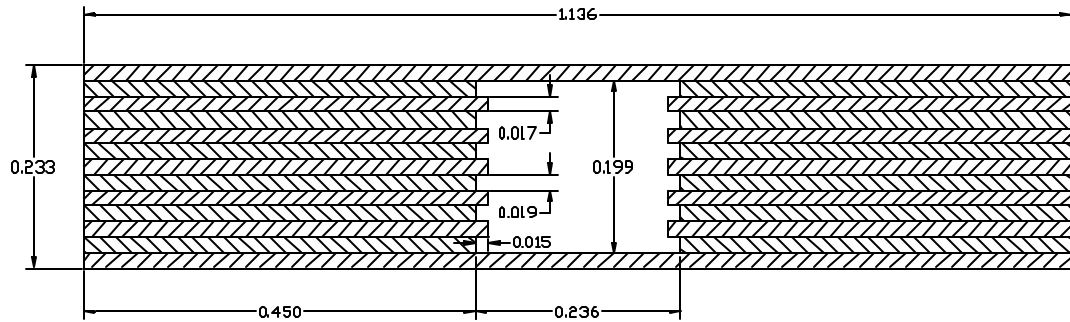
Dimensions (inches) of the PWB cross-section with embedded heat pipe.
